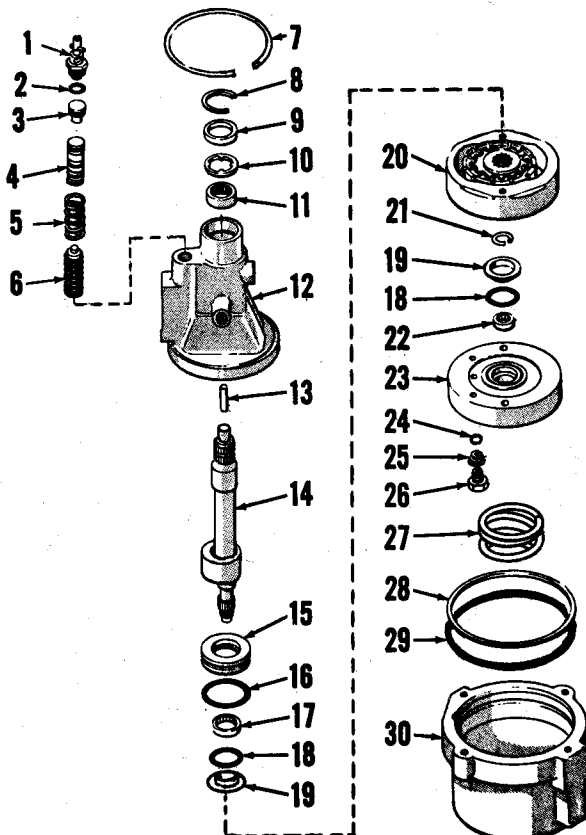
Exploded view of the Saginaw Hydramotor steering unit. Also refer to Figs. 11 to 27 for photos showing disassembly and reassembly techniques.
